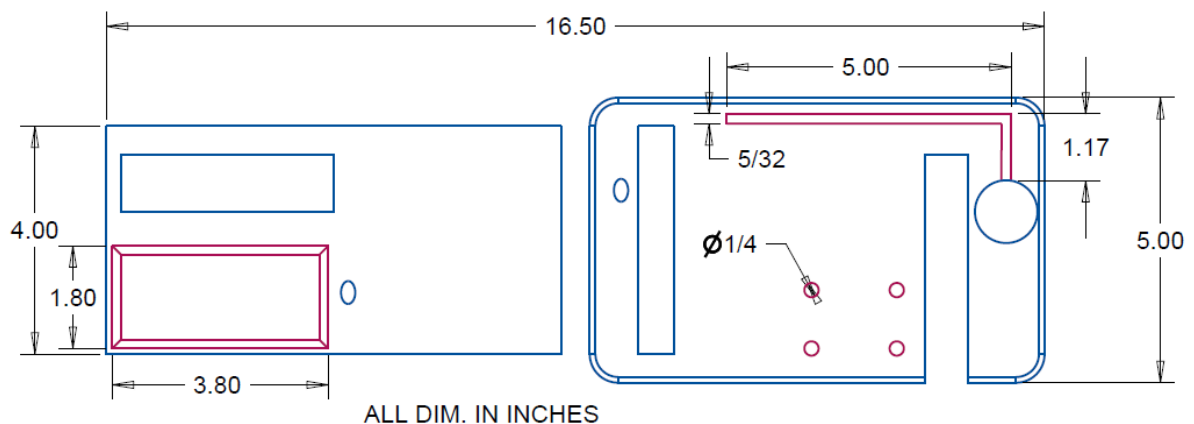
2D Creo Drawing of Wall and Cantilever Pieces in Orientation of Sheet Router Blank
